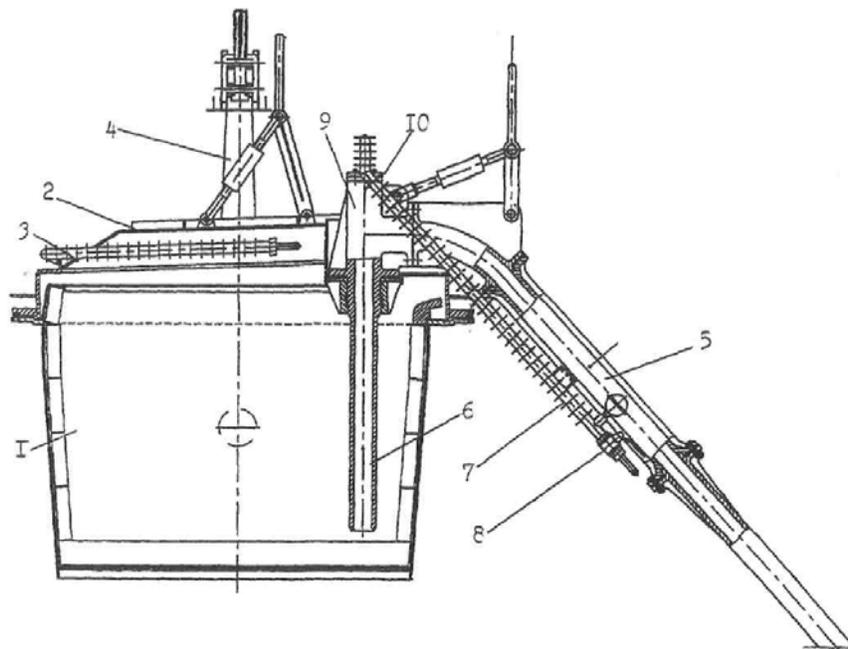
Improved design of a vacuum-transport ladle intended for transporting liquid metal: 1 - body 2 - removable cover; 3 - vacuum line pipeline; 4 - load-lifting beam; 5 - suction tube; 6 - internal tube; 7 - fire tube; 8 - locking device; 9 - reception cavity; 10 - metal-impermeable and gas-permeable filter [13].
